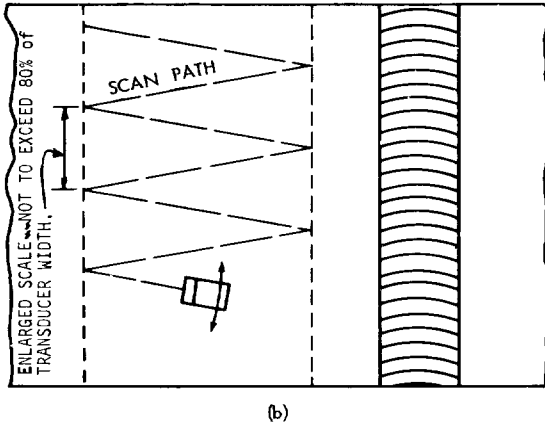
TECHNIQUE FOR INSPECTING BUTT WELDS WITH SHEAR WAVES
